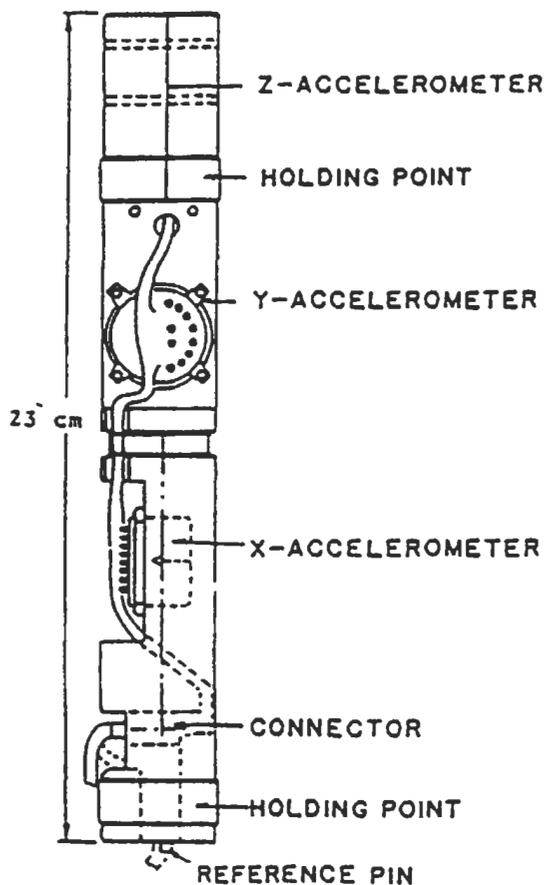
Mechanical drawing of the accelerometer section of a directional tool. (Courtesy Sunstrand [102].)
